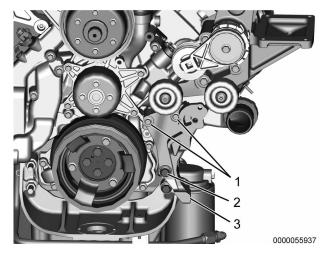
Auxiliary accessory mounting bracket (if equipped)
